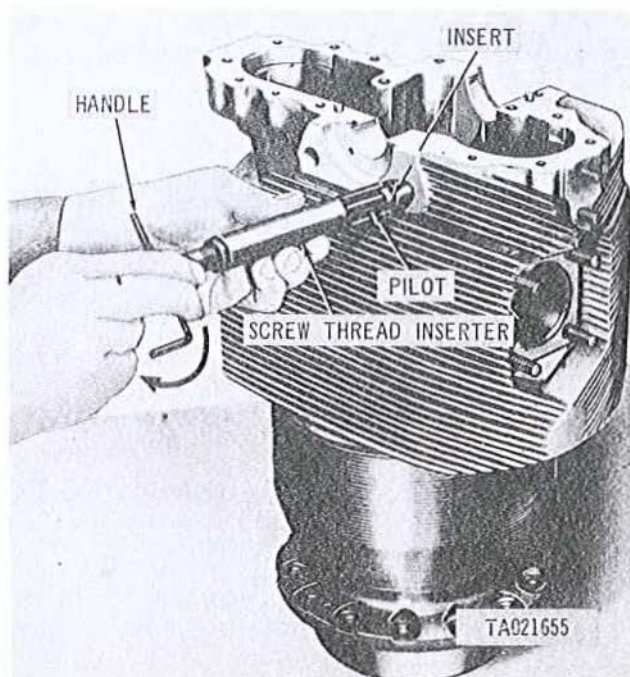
Installing helical-coil threaded insert in cylinder assembly using screw thread inserter.
